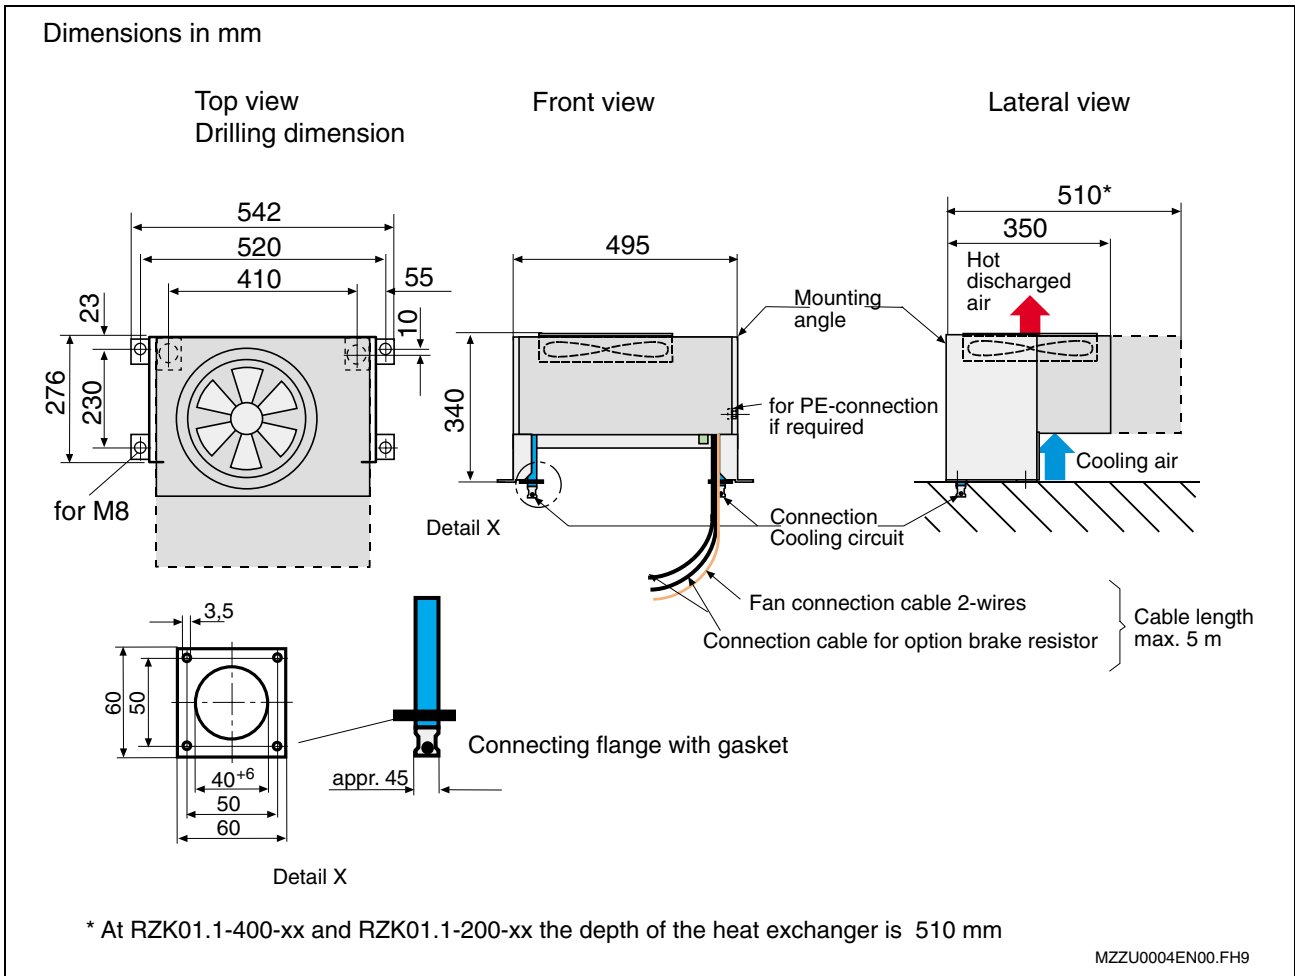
Heat exchanger for outside cabinet mounting
